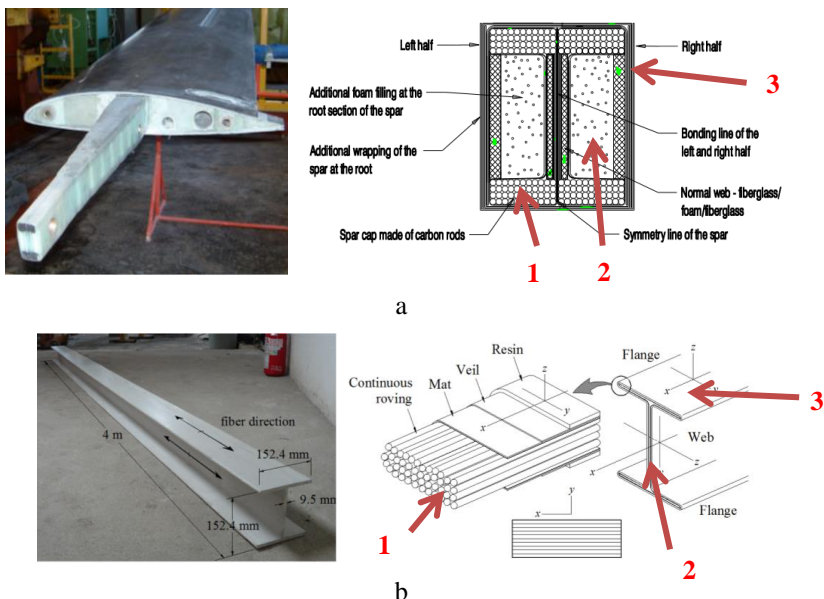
CFRP–GFRP composite constructions: a – glider LAK 17A wing spar cross section [4], b – beam, made of GFRP rods [5]
